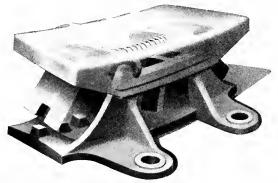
Gravity Side Bearing. W. H. Miner.
